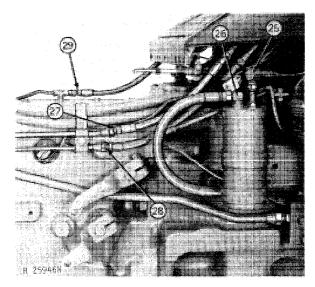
Disconnecting Oil Lines (Sound-Gard Body removed for illustration purposes)
